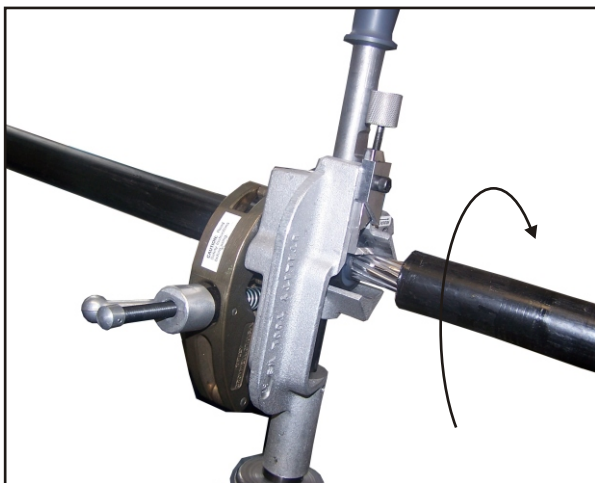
Step 9 - Insulation chip broken off. Strip is complete.
